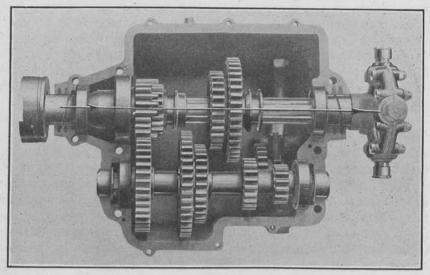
TRANSMISSION GEARS IN DIRECT OR THIRD SPEED
